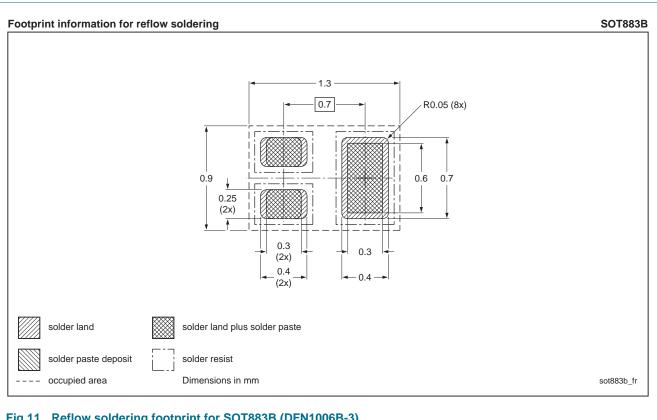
Reflow soldering footprint for SOT883B (DFN1006B-3)
